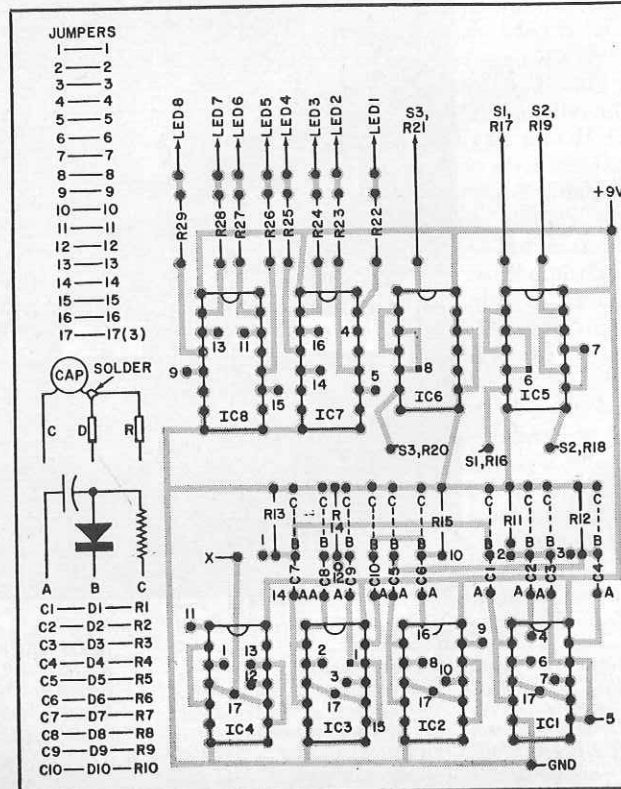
Either a perf board or printed circuit board can be used for the circuit. Note how the C-D-R assembly is made. Be sure to install the jumpers.
